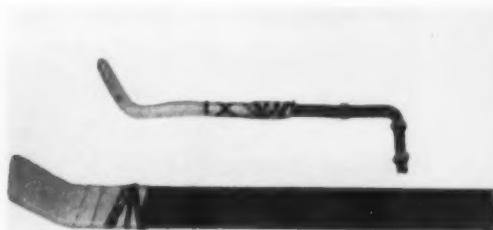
These "pad type" electrodes can be used on flat surfaces or outside corners.
